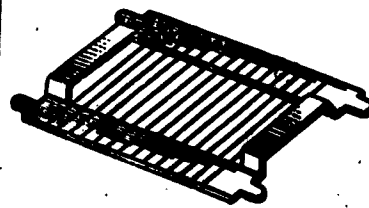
Example of construction of single-sided grid on a stamped frame.
